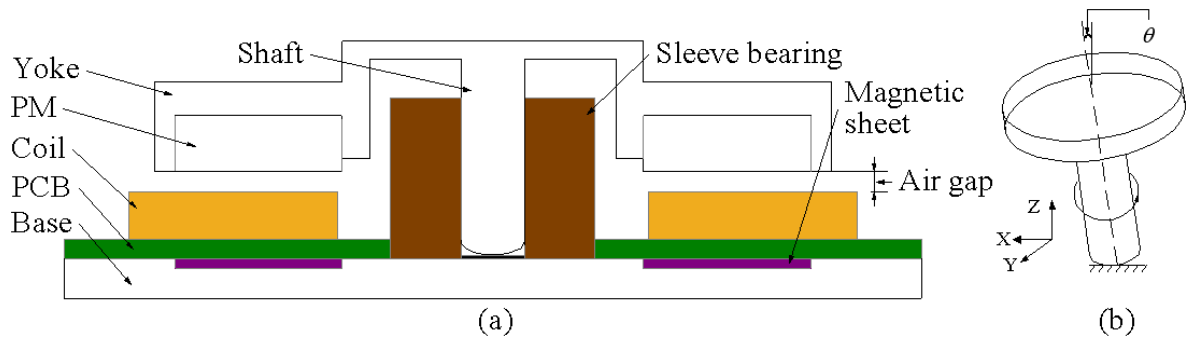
1. The sketch of (a) the micro motor and (b) the tilted rotor.
